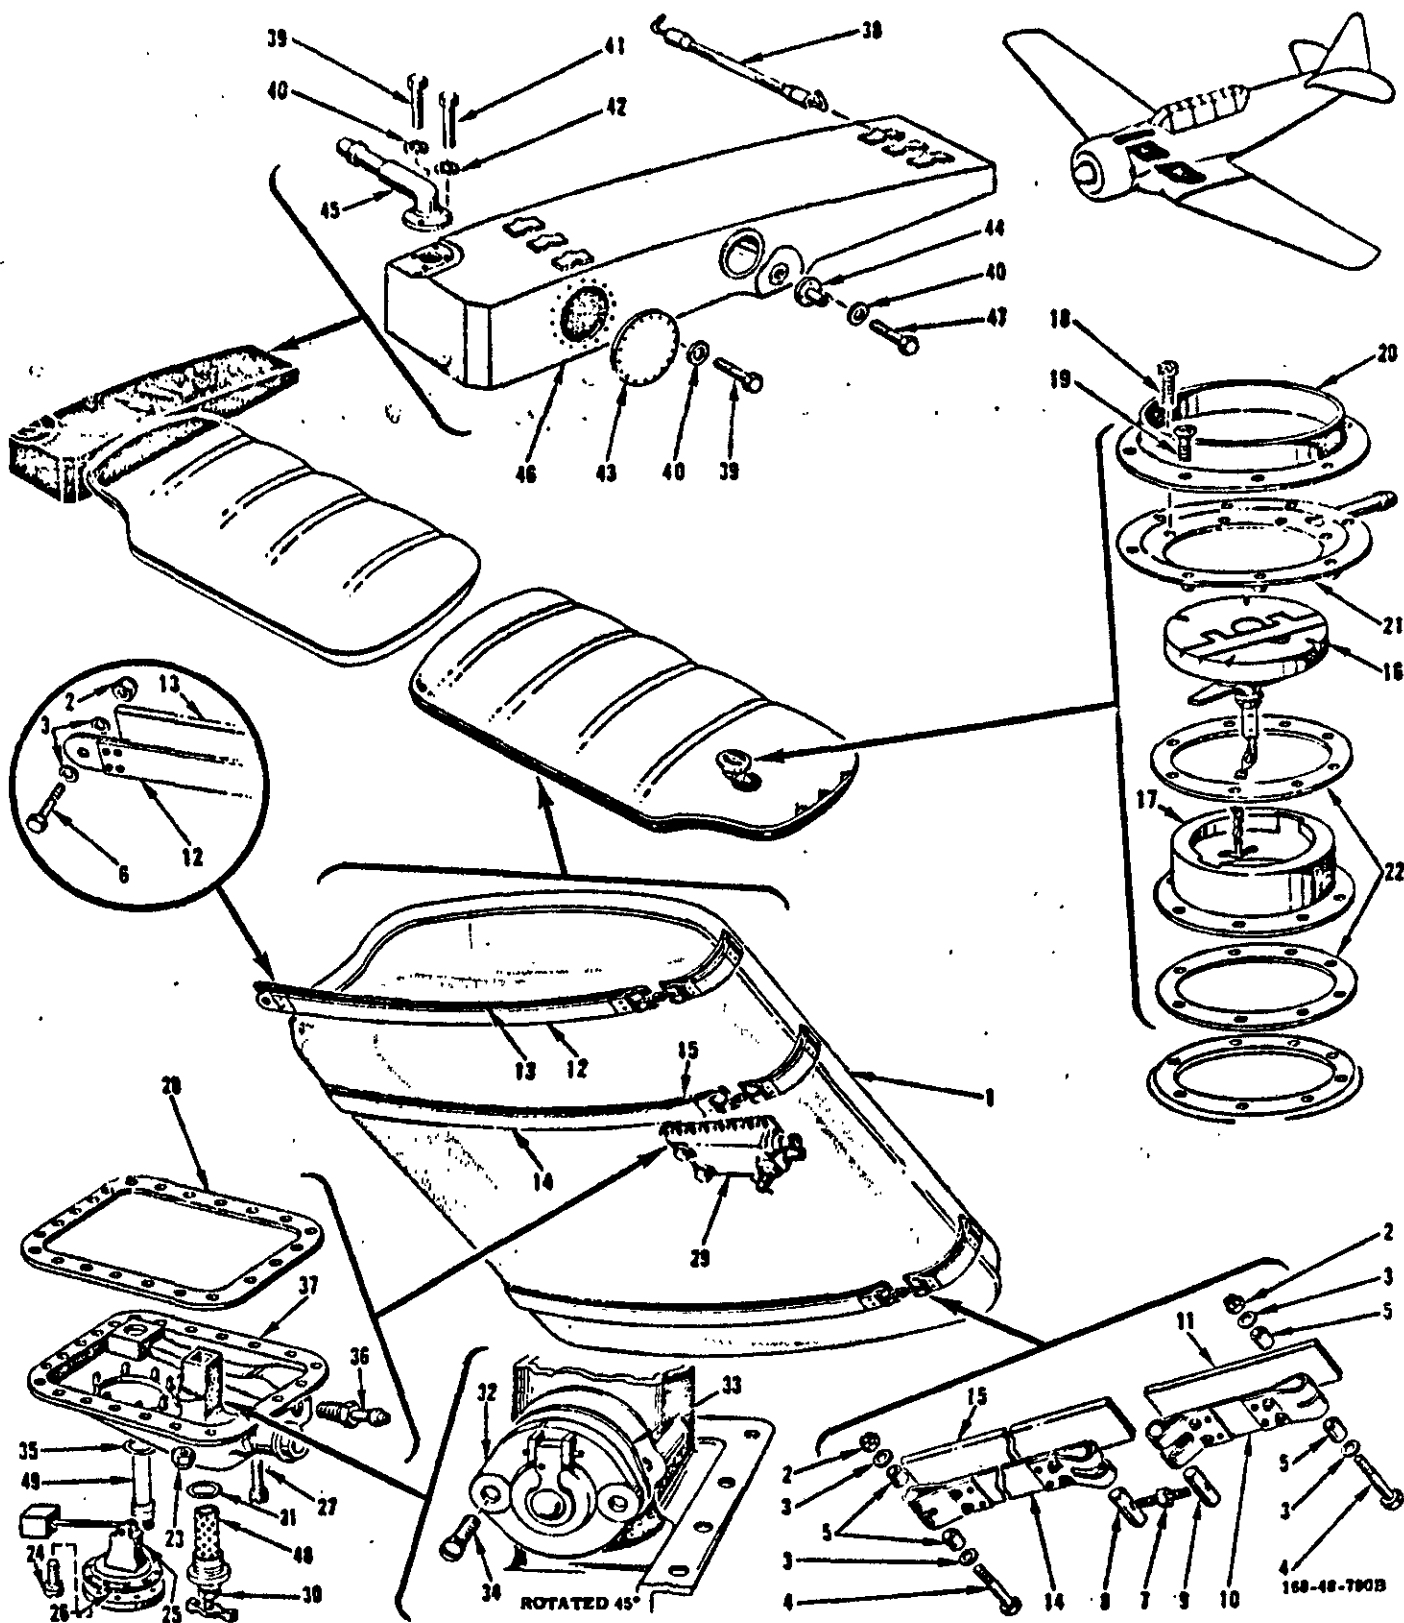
FUEL TANKS AND ATTACHING PARTS
